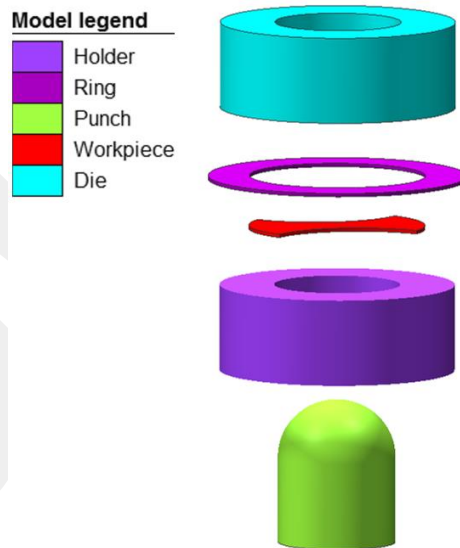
The exploded view of 3D Modeled Nakajima specimen forming simulation by Simufact forming
